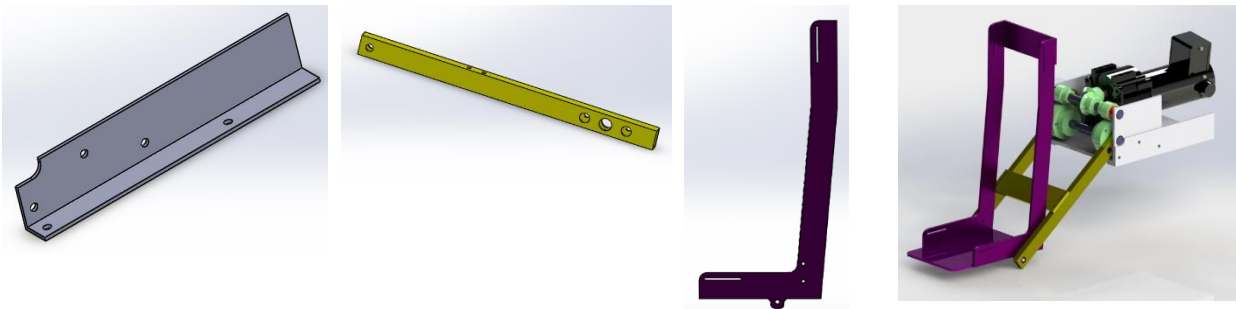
From left to right: shaft support, input link, boot side, and full foot mechanism
